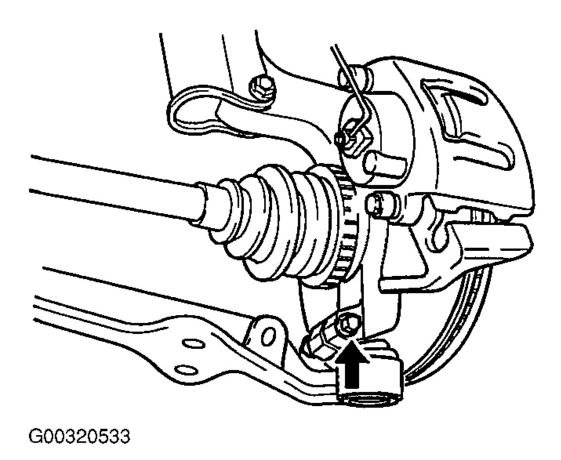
Removing Pinch Bolt From Knuckle Courtesy of KIA MOTORS AMERICA, INC.
